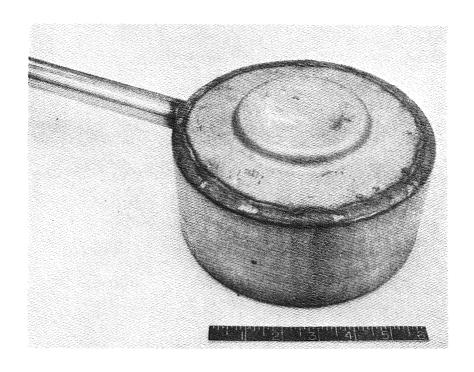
Complete Simulated Impeller Assembly Ready for Bonding
